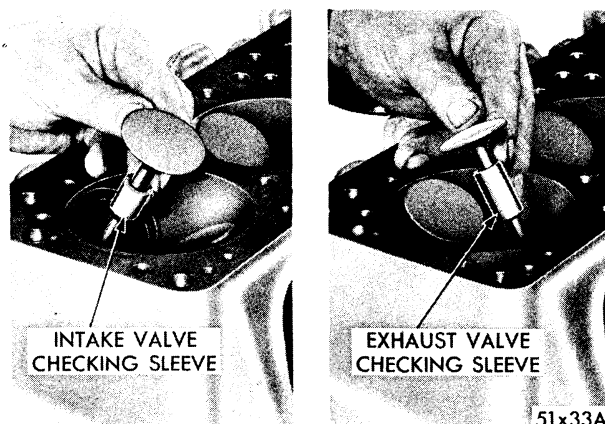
Installing Sleeves to Check Guide Clearance (FirePower) (Typical of SpitFire)
